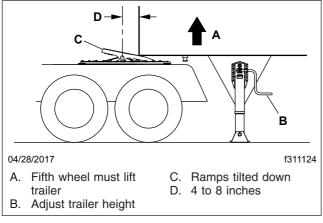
, Trailer Connection Point, Standard Fifth Wheel
